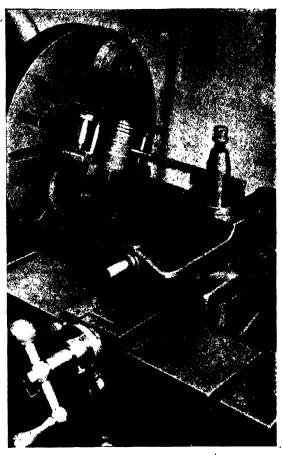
Use of faceplate in Boring Gudgeon-Pin Hole in Piston
